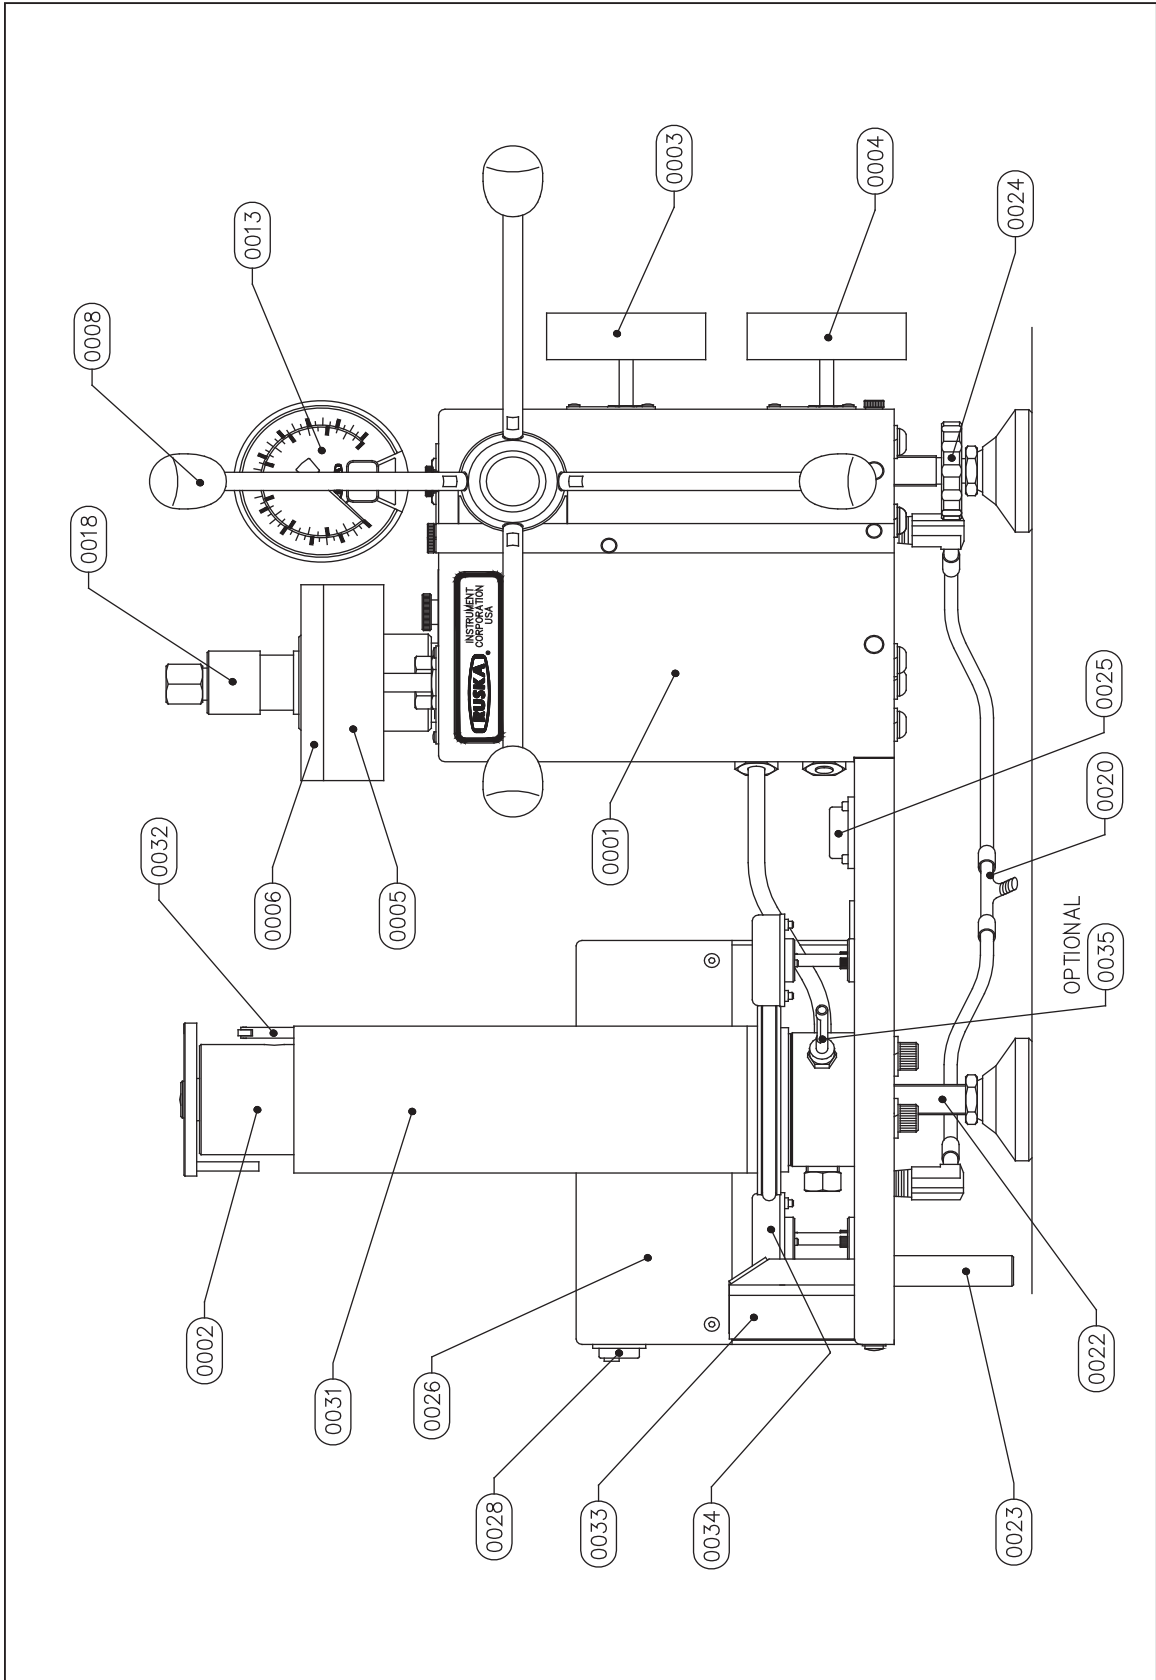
Front View - RUSKA 2485-950 (similar to RUSKA 2485-930)
